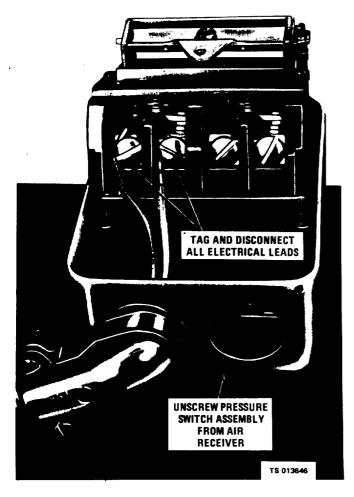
Pressure switch assembly, removal and installation (shown with cover removed).
